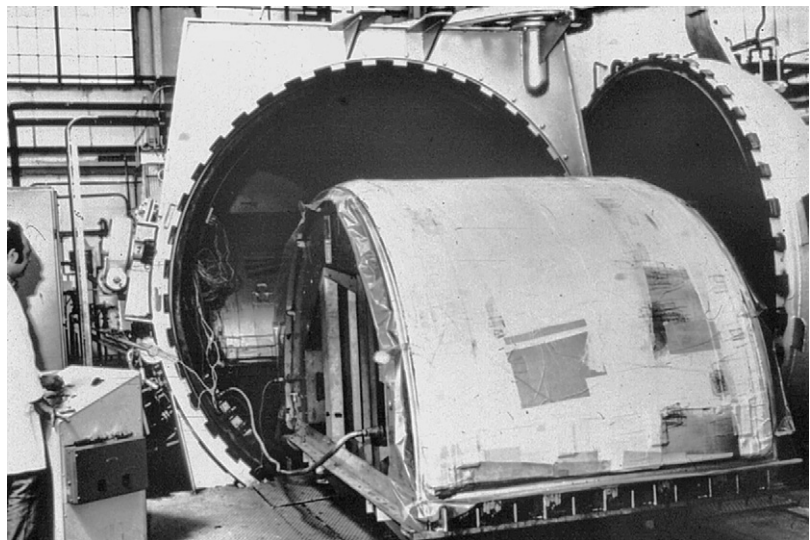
Dornier helicopter rotor blade clamped before autoclave curing.
